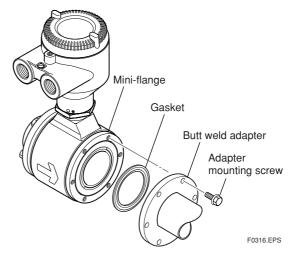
Mounting Procedure for Weld Joint Adapter
